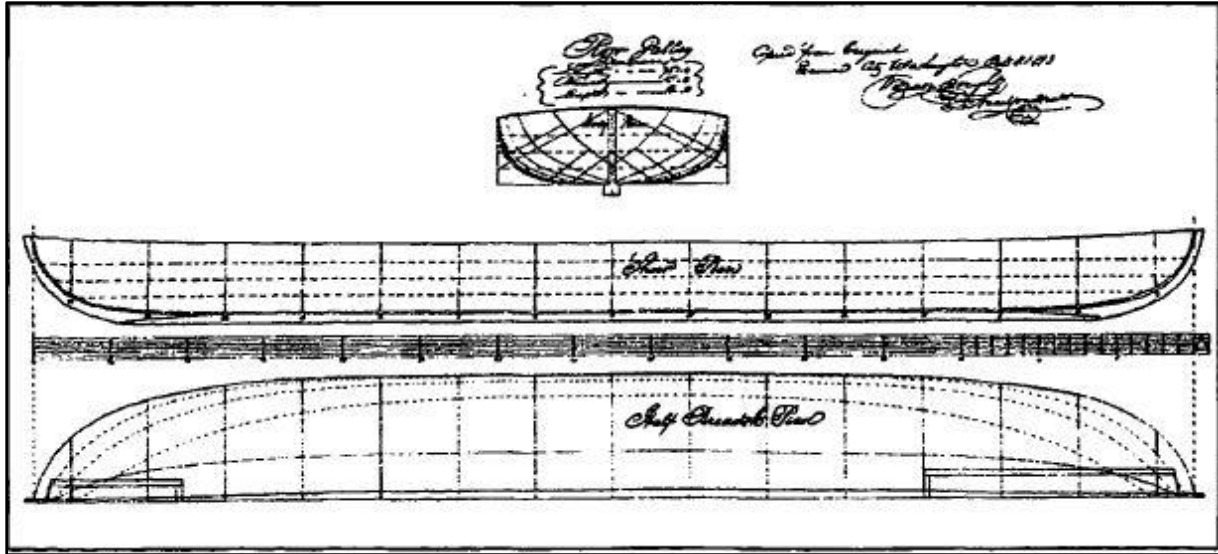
1813 design plan for a 75-foot row galley (Emery 2003:58).
